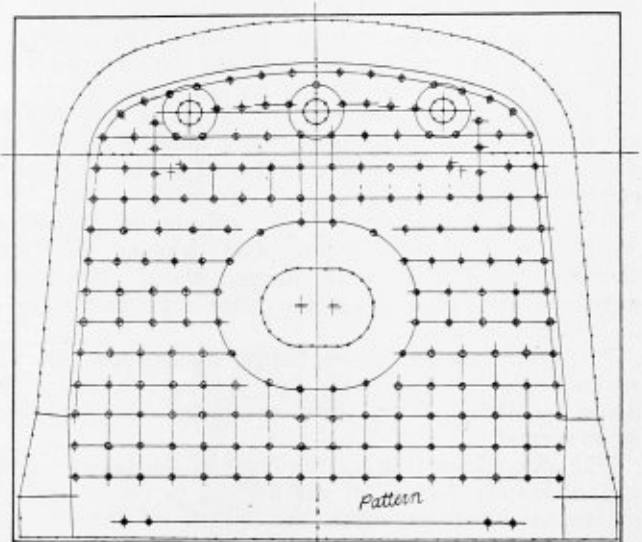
Firebox back sheet layout, ready to be drilled (when drilling sizes have been shown) and trimmed
